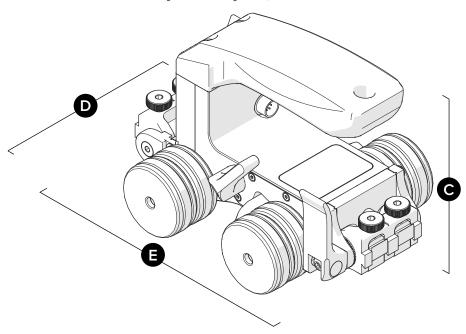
Cart with double wheels and MICROBE rear pivot, dimensions
